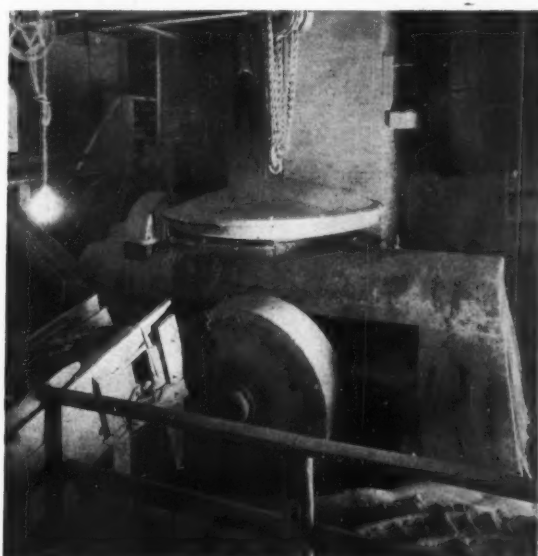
Large dry pan using step bearing mounting shown in Fig. 9
